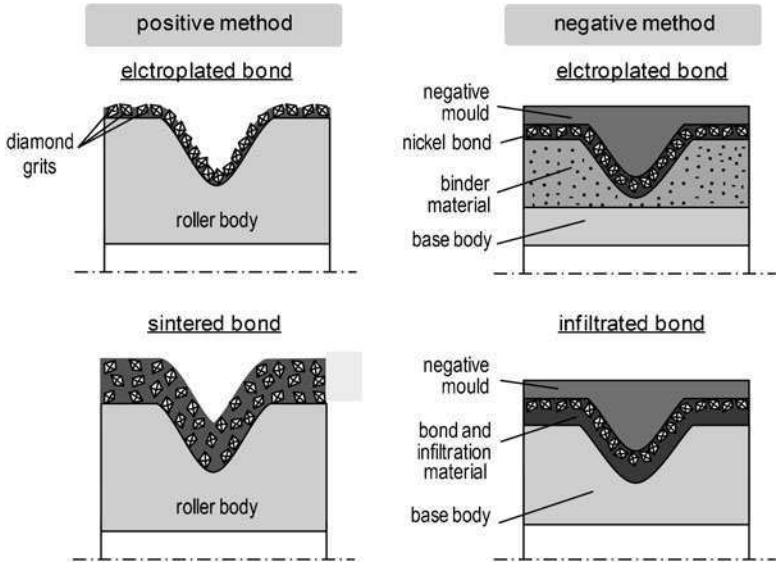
Schematic illustration of the manufacturing methods for rotary diamond dressers [33]
